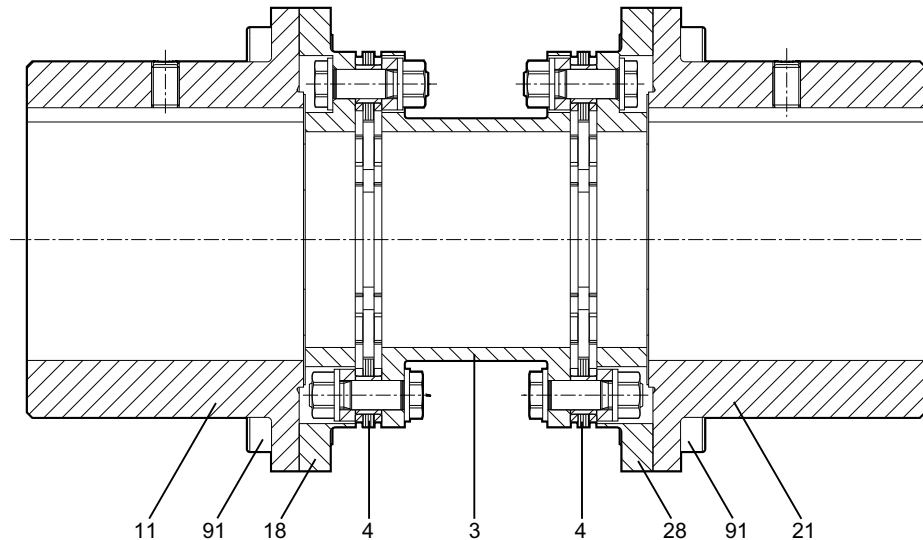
Spare parts drawing for type MFEFM / MFHFM
